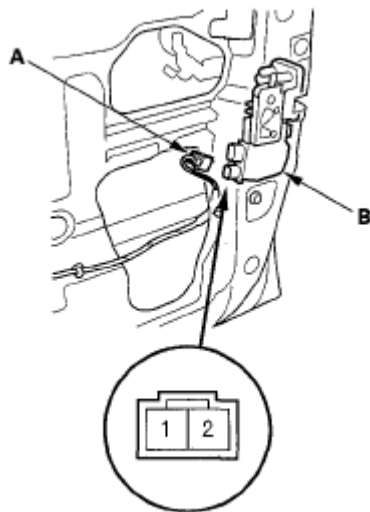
Identifying Door Lock Actuator 2P Connector Terminals (Passenger's Door)
